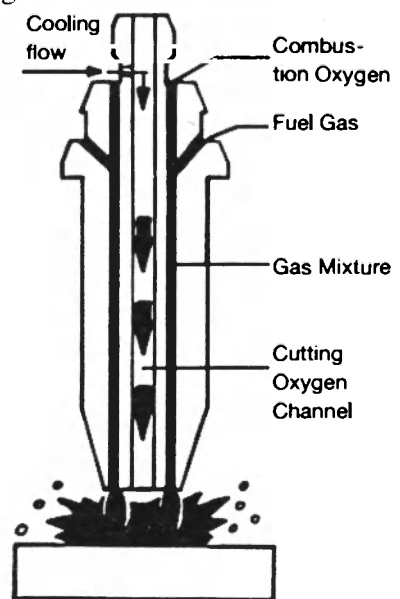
Showing the principle of a Gas-Mixing Nozzle with a Cooling Stream Valve
